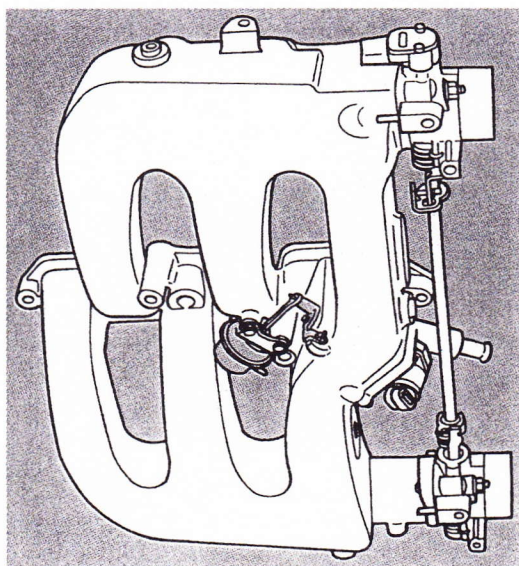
Typical tuned intake manifold for a port injection engine. *Courtesy of Chrysler Corporation
